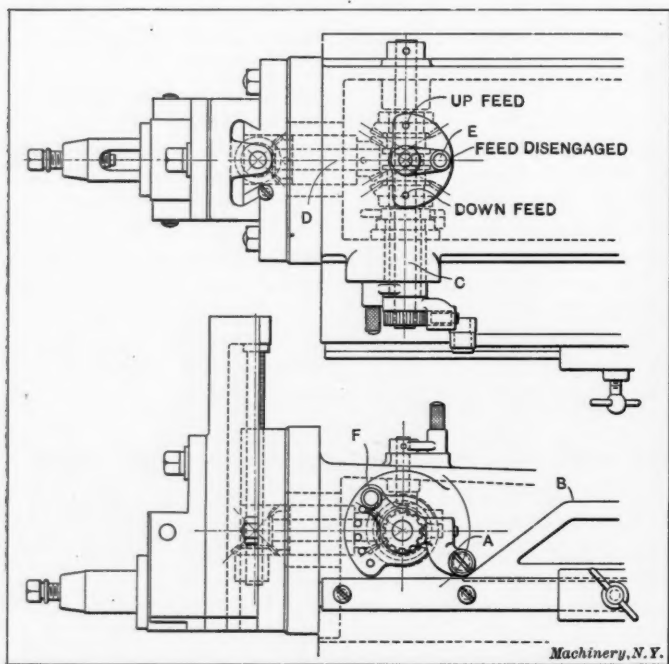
Elevation and Plan of Vertical Feed Mechanism for Rockford Shaper
